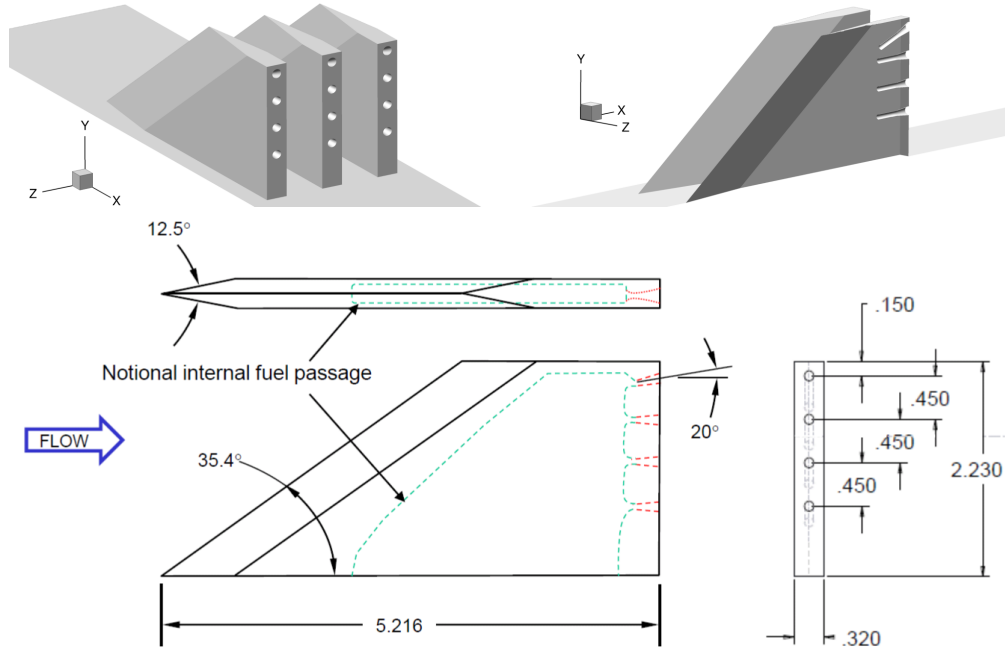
Isometric views and dimensional details of the baseline strut injector (dimensions are in inches).
